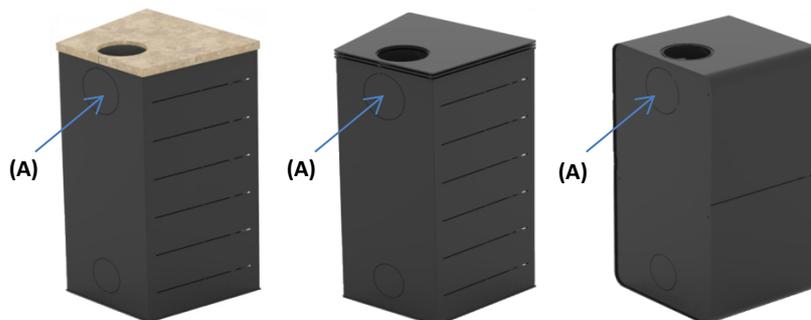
Rear view of each model; (A) Section to be removed before changing the fume outlet to the horizontal position.
